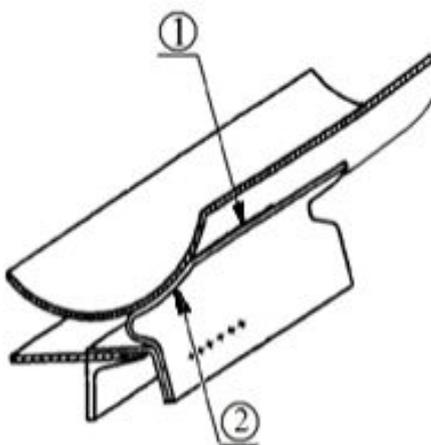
Illustration, supplemented in welding and melting instruction
